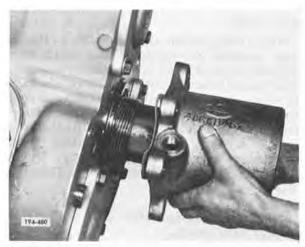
Installing Mainshaft Rear Bearing Cover Assembly
